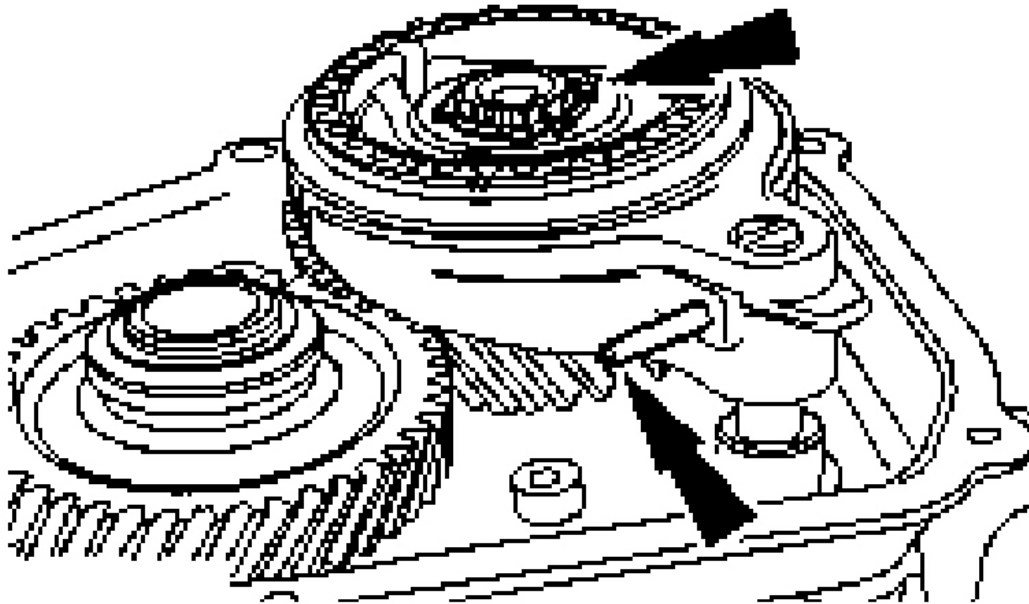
Assembling Fifth Gear Synchronizer Unit
